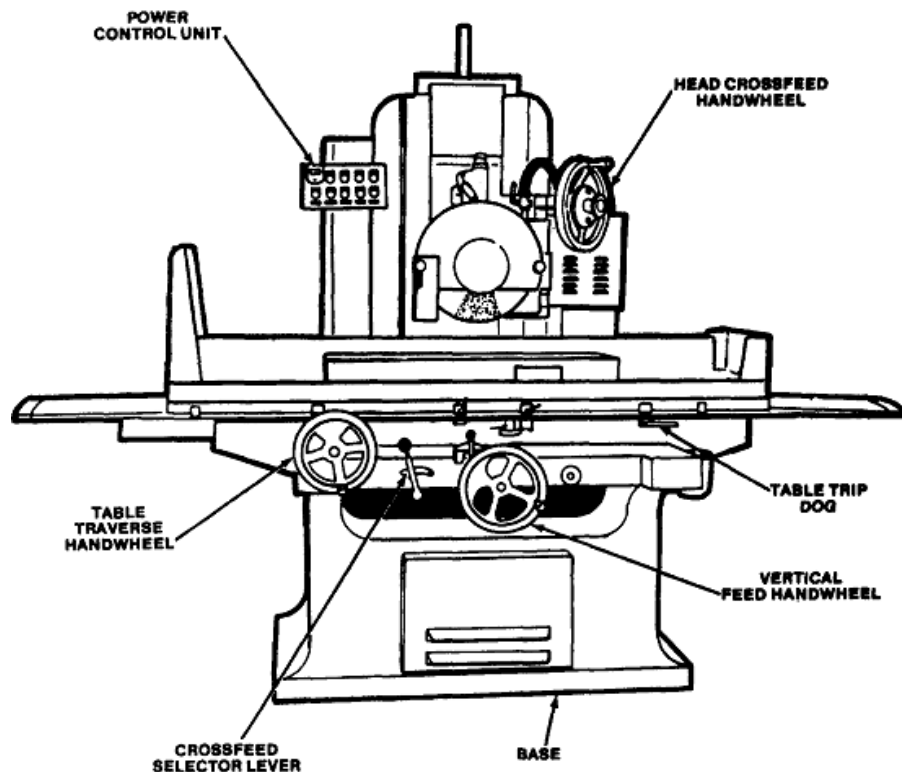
Horizontal-spindle reciprocating-table Surface grinder
